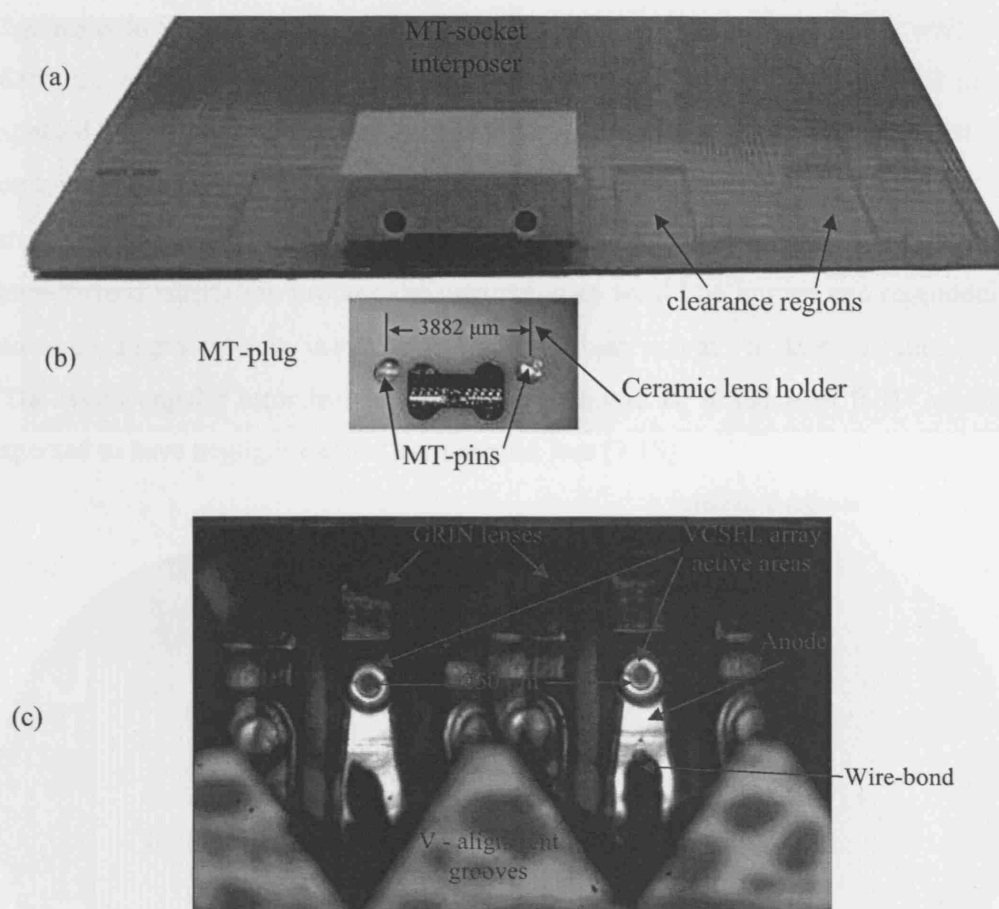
(a) PCB with MT-socket interposer mounted on the surface about to slide back into position against backstops. (b) MT-plug with ceramic lens holder in place. (c) An array of GRIN-lenses held on V-alignment grooves aligned to the array of VCSELs (2 out of the 4 GRIN-lenses and VCSELs in the array are shown) was used to protect the wire bonds. Lenses were designed to image VCSEL output to the exterior surface of the lenses. Picture was taken under a microscope with a 30x microscope objective lens.
